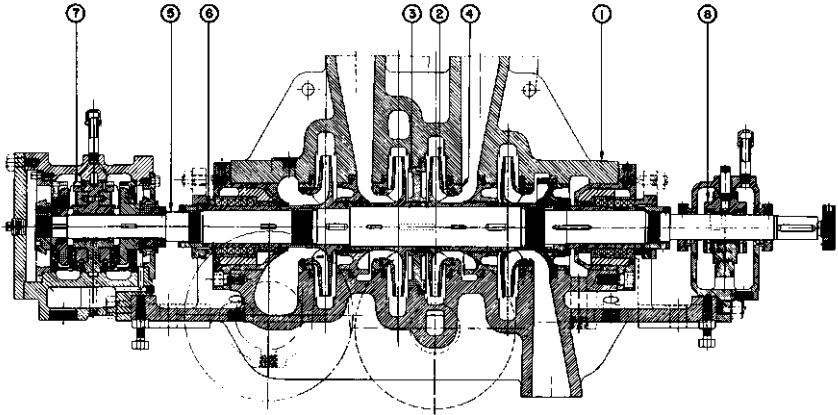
Flex-coupled multistage centrifugal main feed pump (Flowsolve Corporation)
